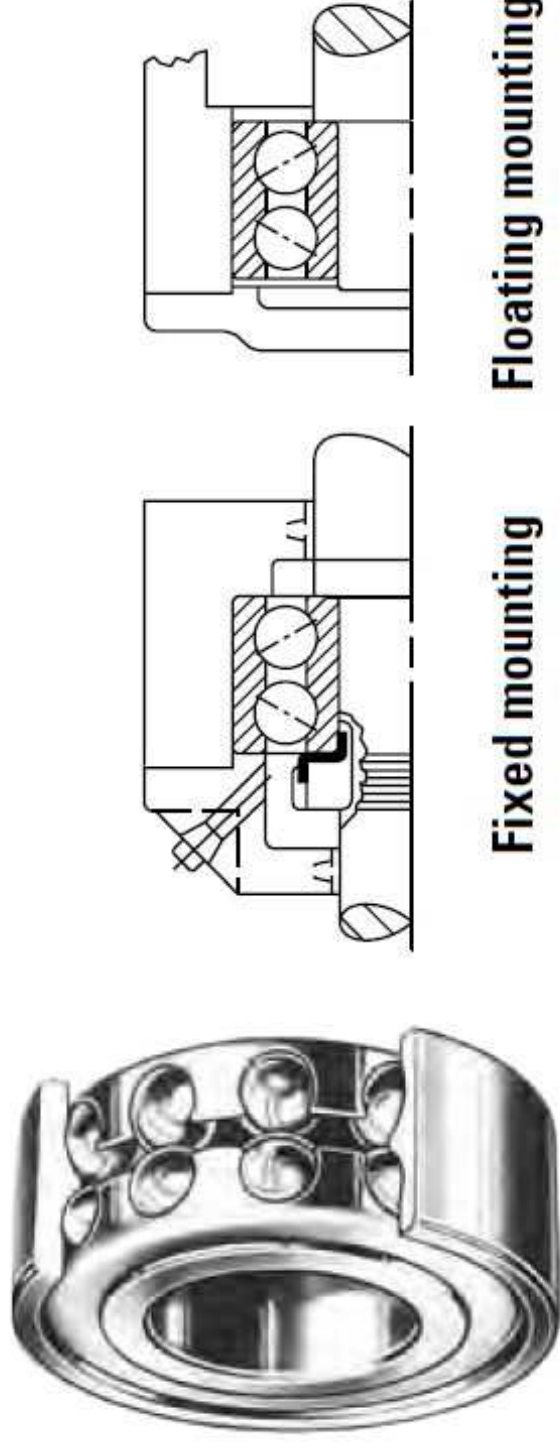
Typical mountings for double-row, angular contact ball bearings.
